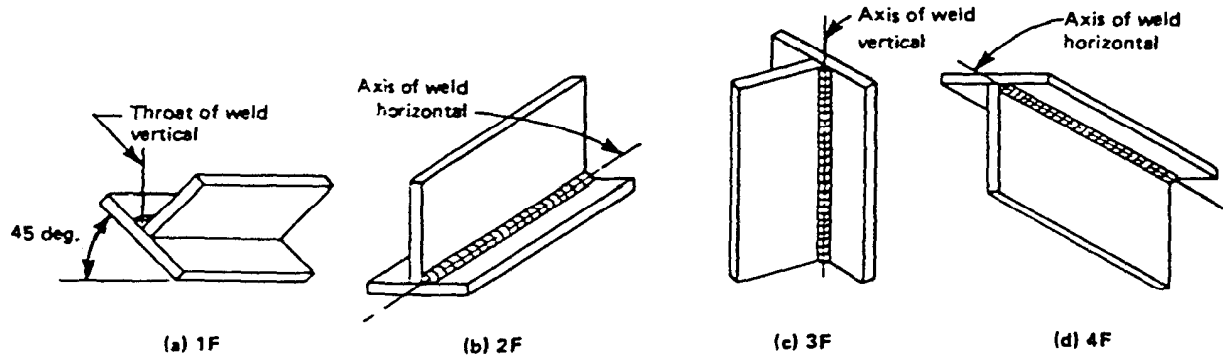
Fillet Welds in Plate, Test Positions
